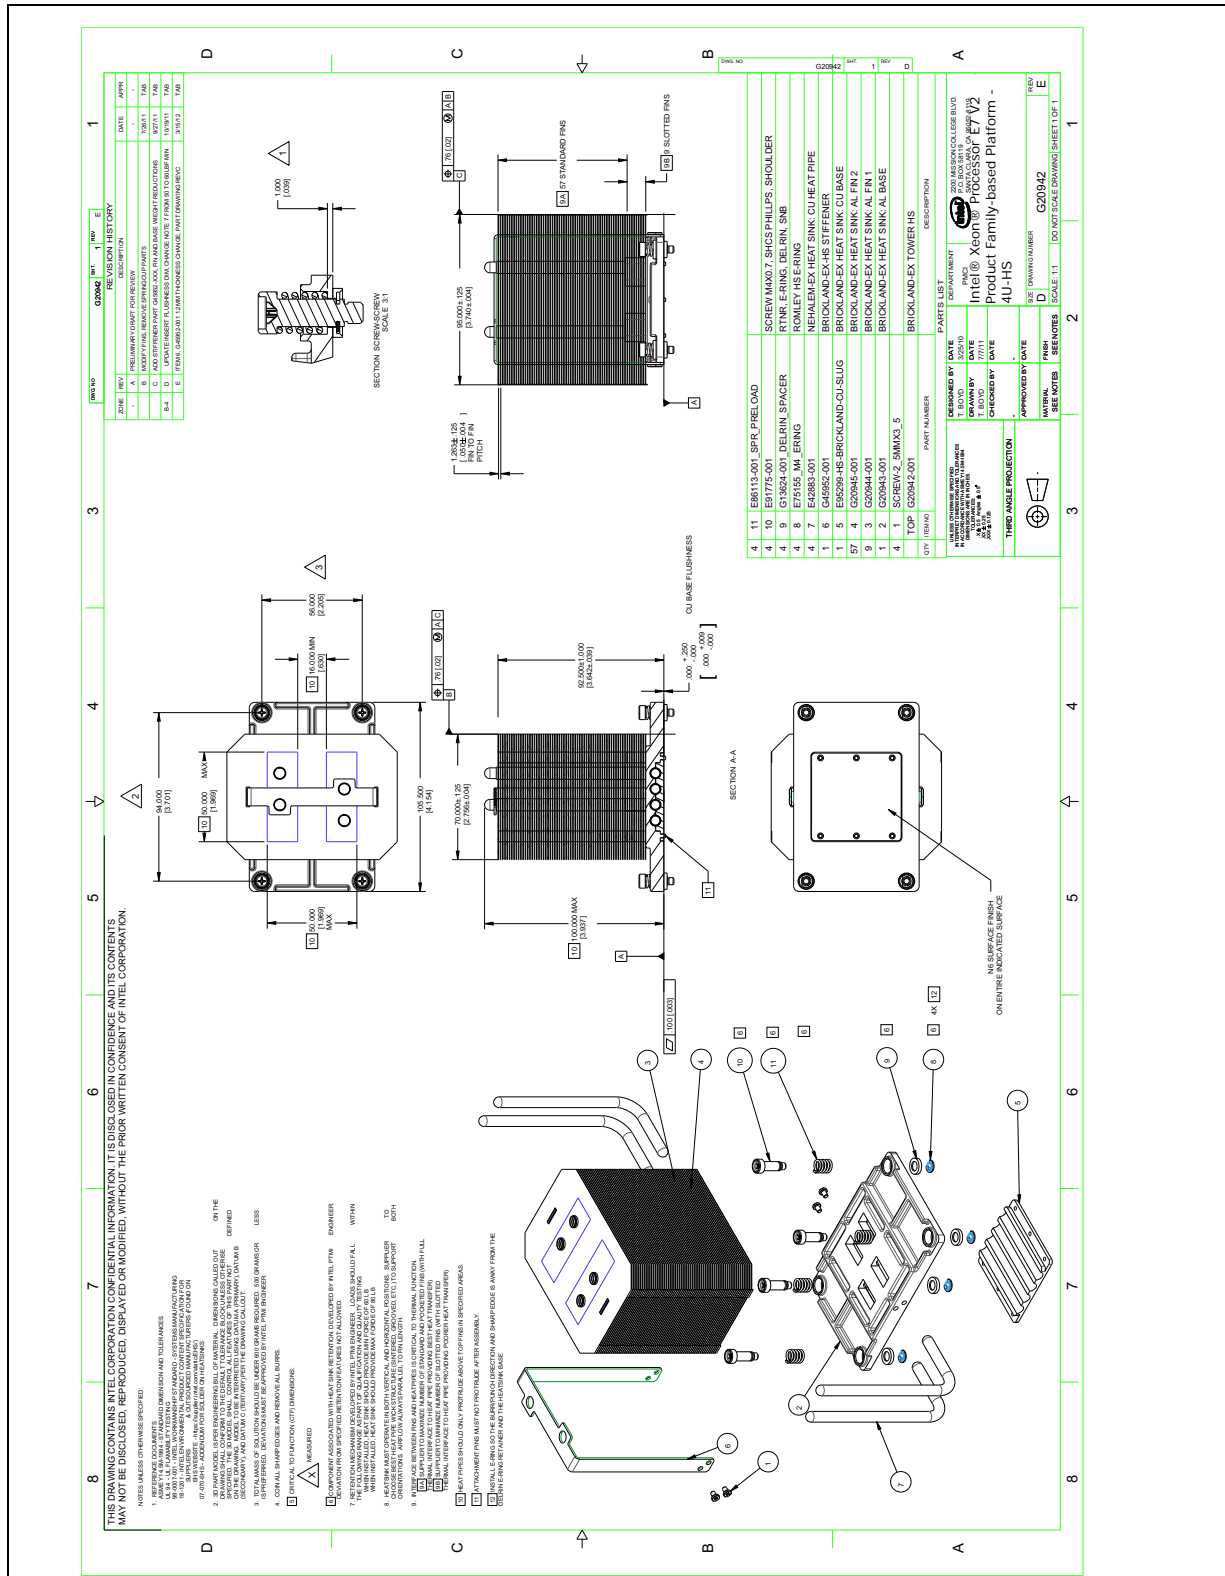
Processor 4U Heatsink Heatpipe Mechanical Drawing - E42883 Rev 1
